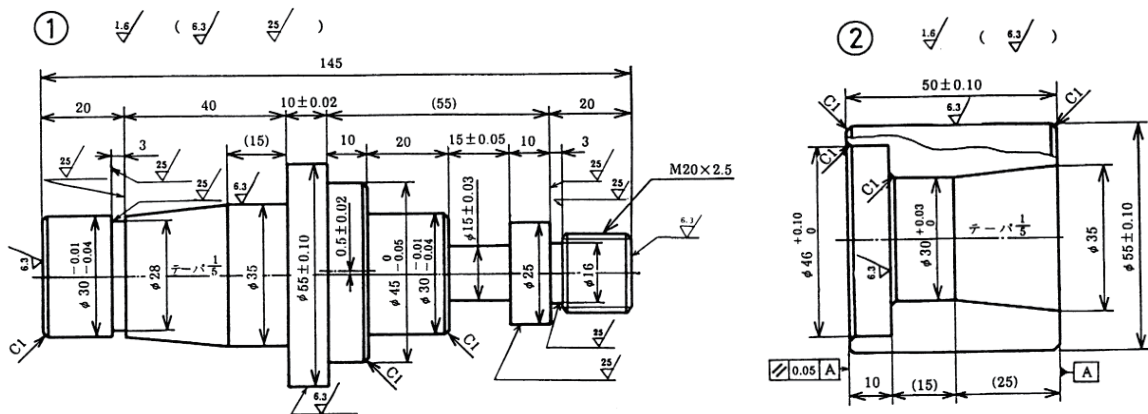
Production drawing of skill proficiency test lathe 2nd grade
